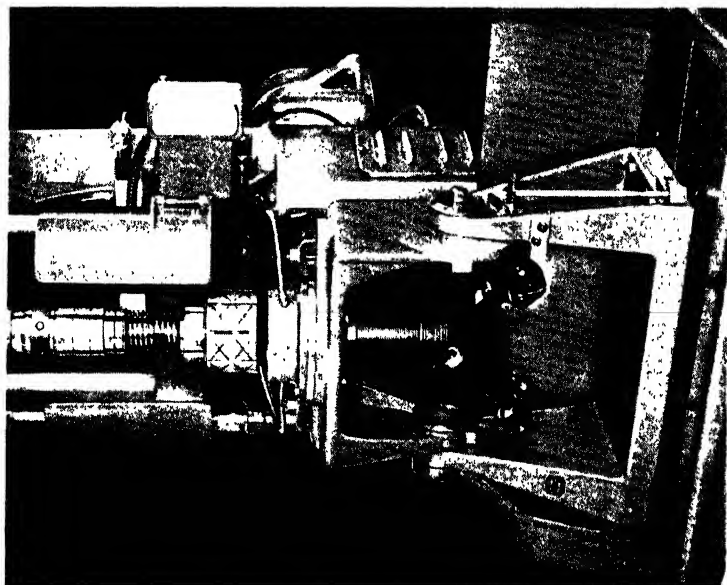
Another View of Machine Seen in Fig. 1 Equipped with Cast-iron Laps which are Used after Finish-honing
